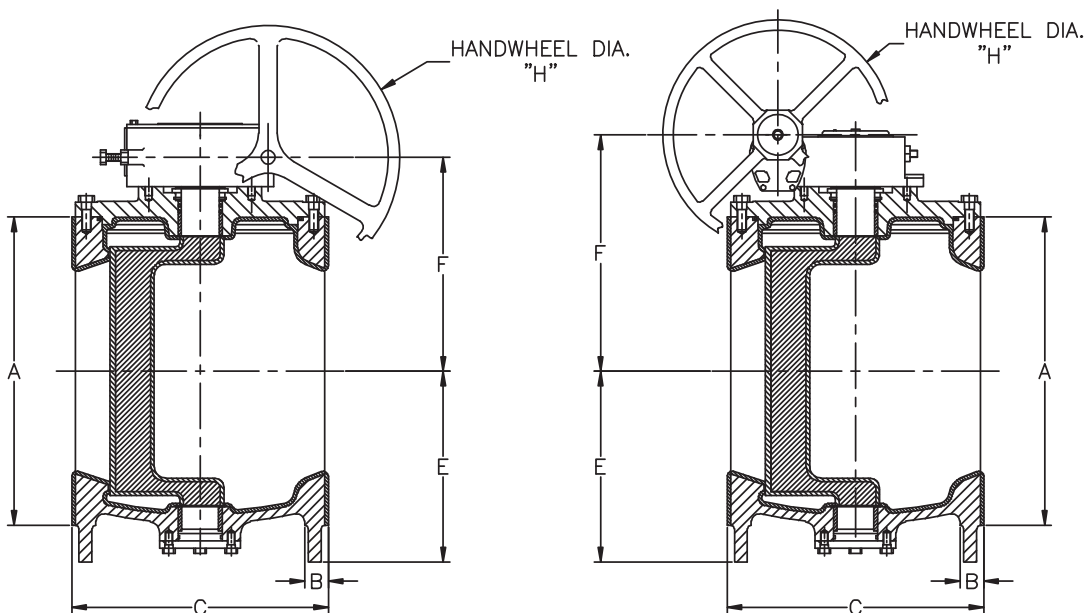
RL Rubberlined – Flanged End 3" – 12", 175 PSI, 14" & Larger, 150 PSI
